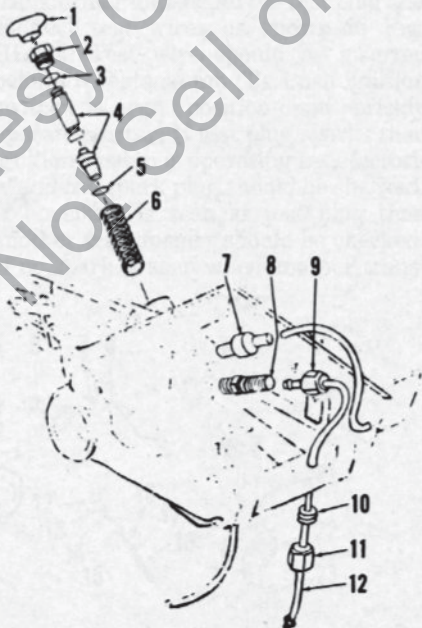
Exploded view of manual oil pump. End of oil line (12) is connected to fitting (24—Fig. HL276). Oil line (12) must be disconnected from fitting and pulled into air box for removal.
